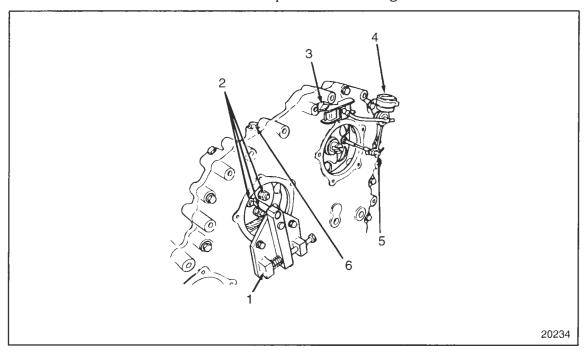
Camshaft Drive Gear-to-Adjustable Idler Gear Lash Measurement
